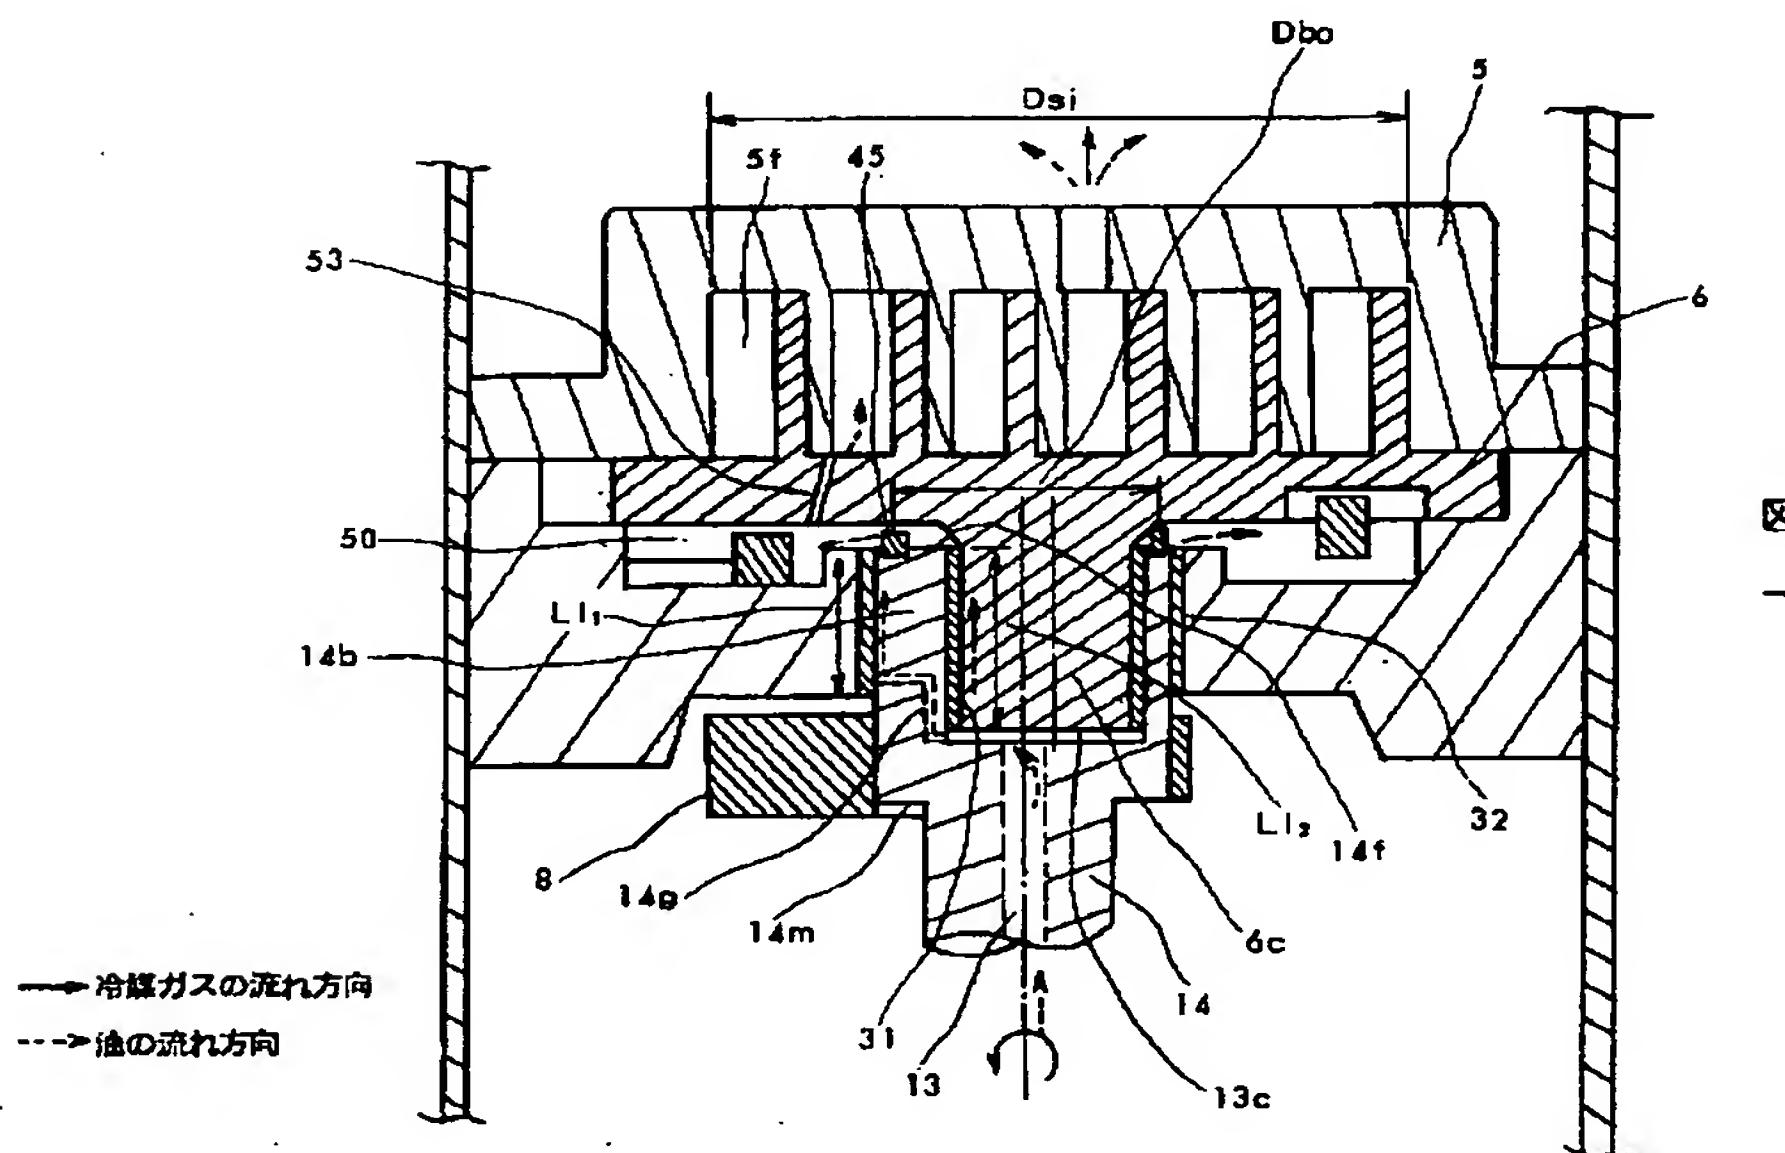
The fragmentary longitudinal cross-section of the periphery of a bearing part showing other examples.
